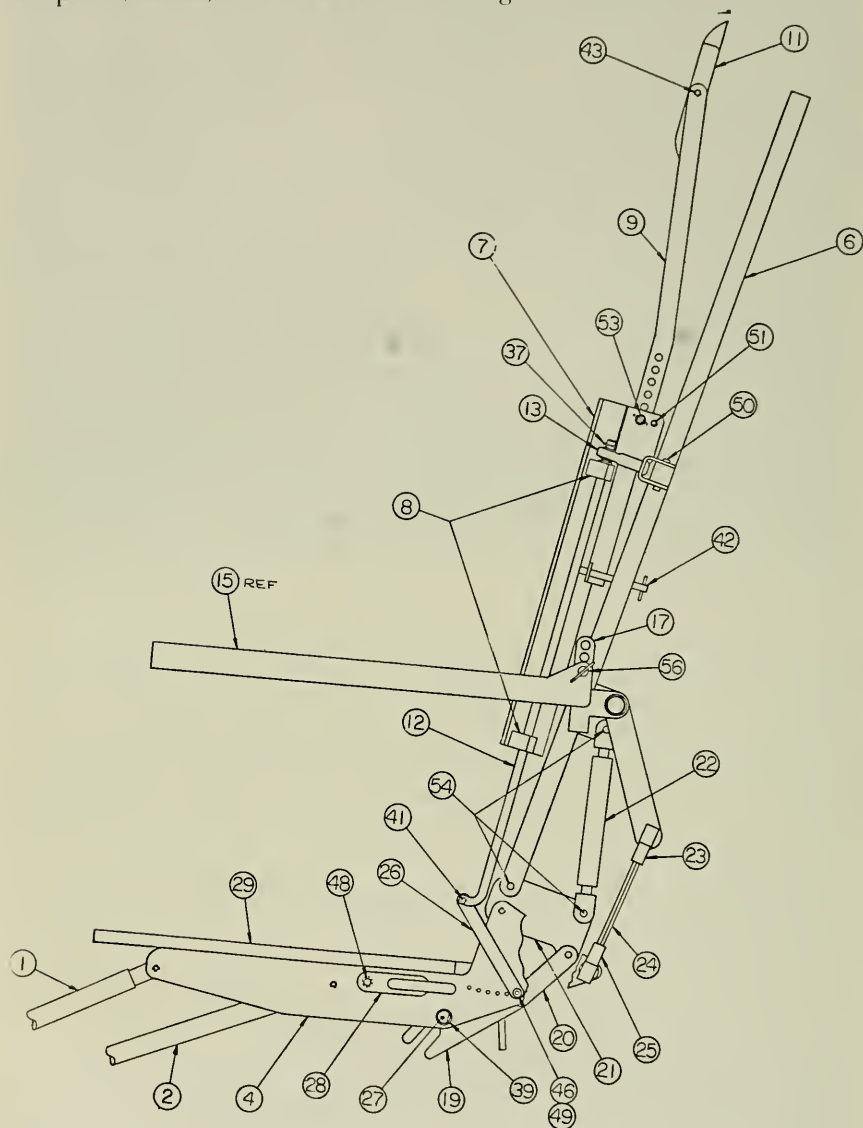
Assembly drawing of the new seat, backbrace, pivot, and recline system.
